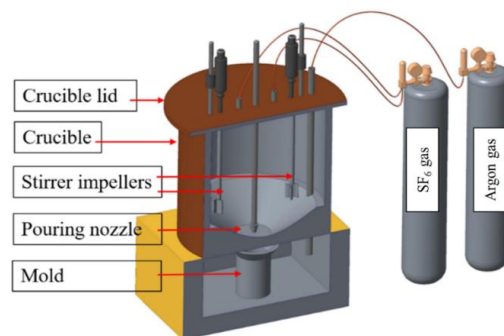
Melt-stir casting setup with Argon and SF₆ gas shield
